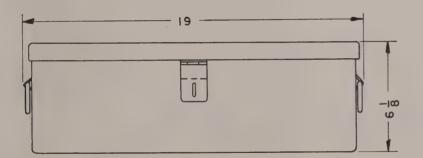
Low-Pass Filter F-218/URR-35, Outline Drawing
